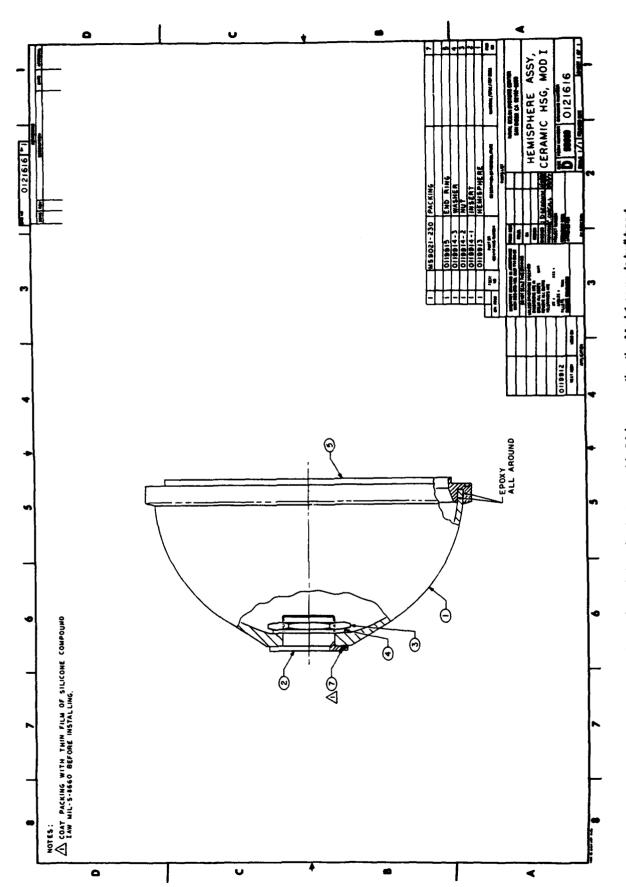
Ceramic housing test assembly 2A incorporating the Mod 1 ceramic builthead
